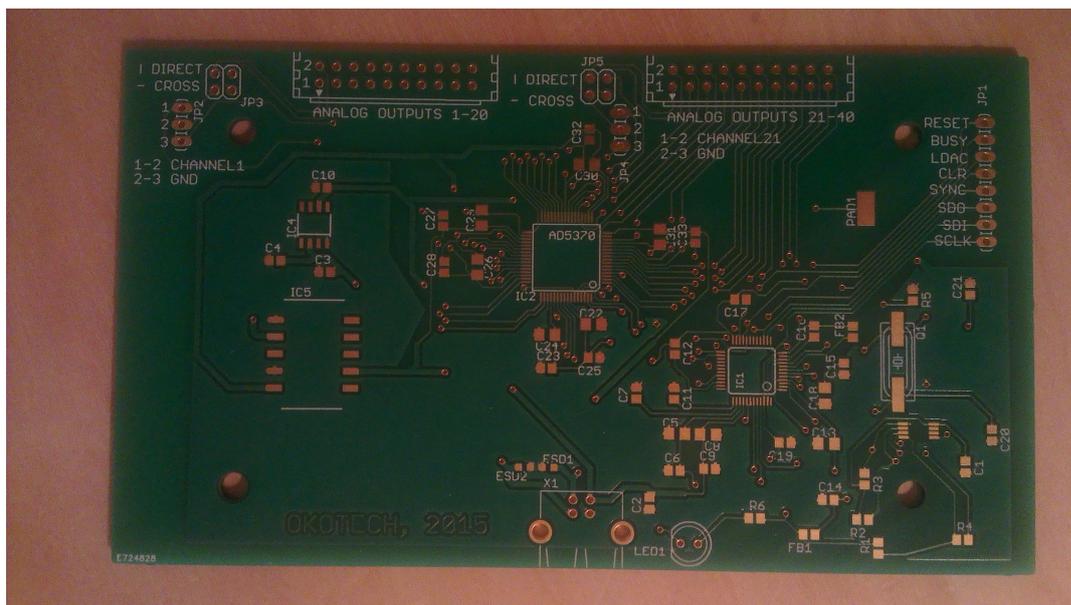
PCB design, manufactured by Eurocircuits, without components soldered on it.
